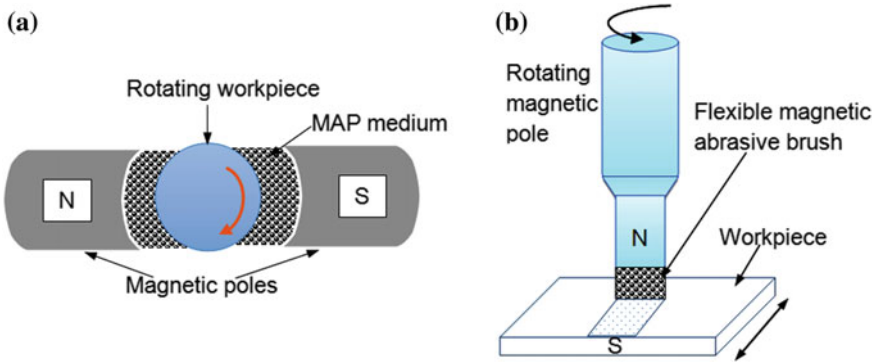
Schematic representation of MAF experimental setup while finishing a cylindrical and b flat workpiece
